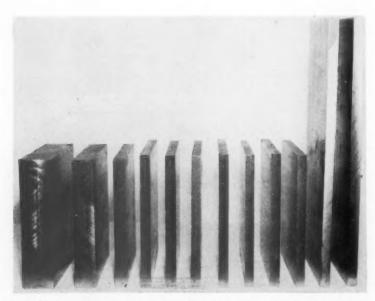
CAST STEEL PLATE SPECIMENS MILL-MACHINED ON ALL FACES AND EDGES.
